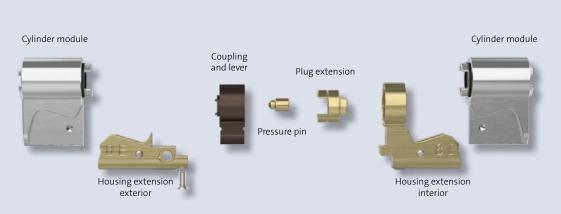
Illustration shows an 812MO double cylinder + MOKI-08-00 with dimensions 35.5 (interior)/27.5 mm (exterior)
